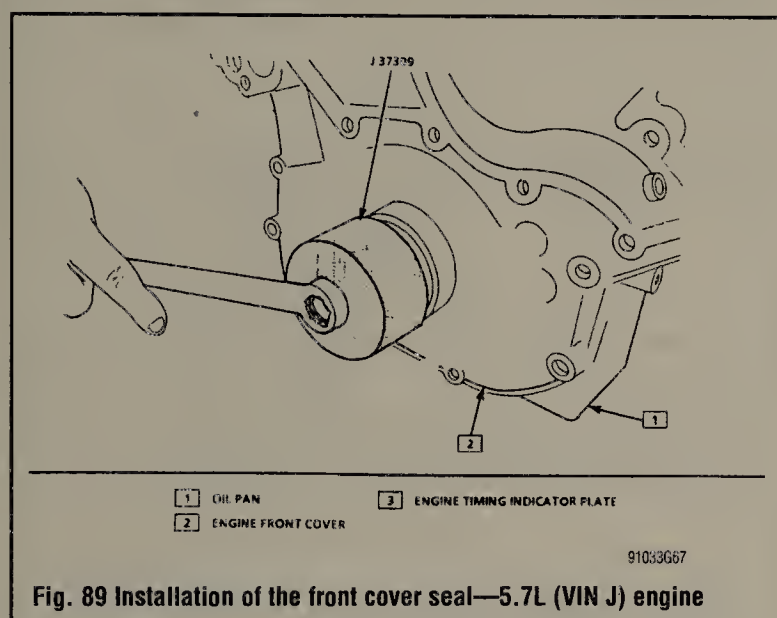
Installation of the front cover seal—5.7L (VIN J) engine
